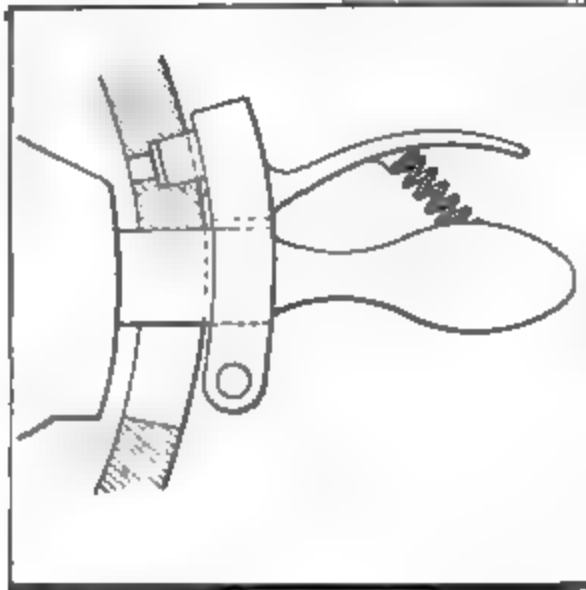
Withdrawing and Locking Device on Change-gear Box
